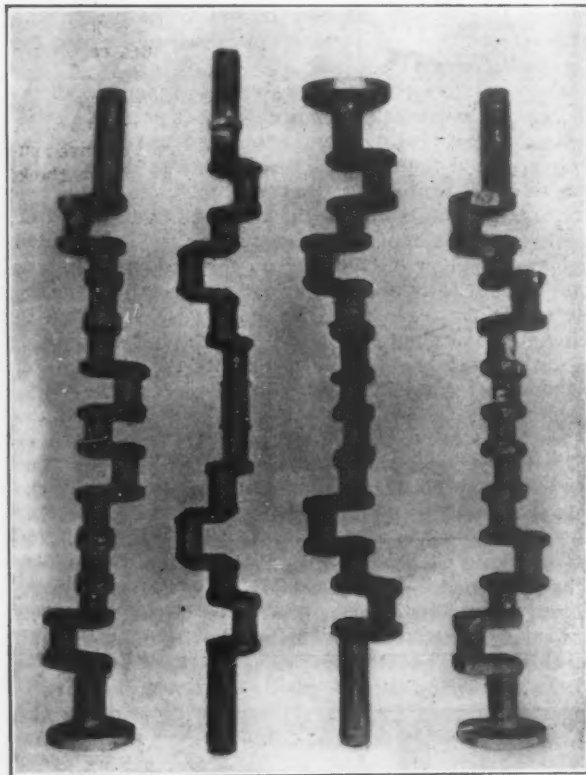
Broken or Defective Automobile Crank Shafts After Welding.
